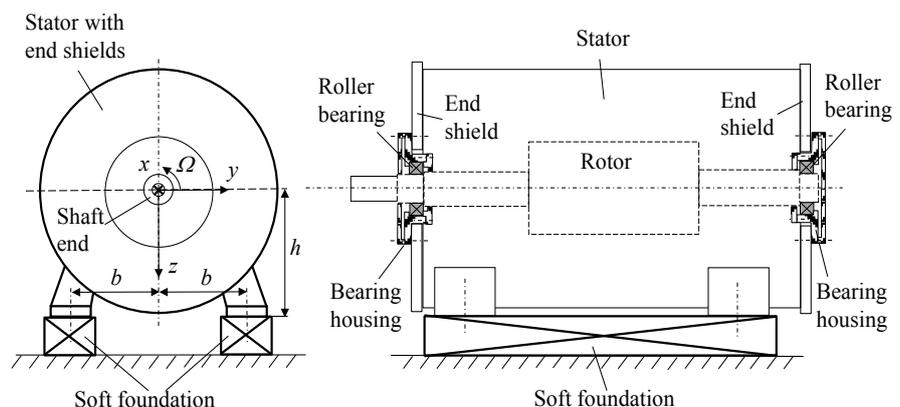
Special kind of rotating machine with rotor, roller bearings, bearing housings, end-shields and stator, mounted on a soft foundation.
